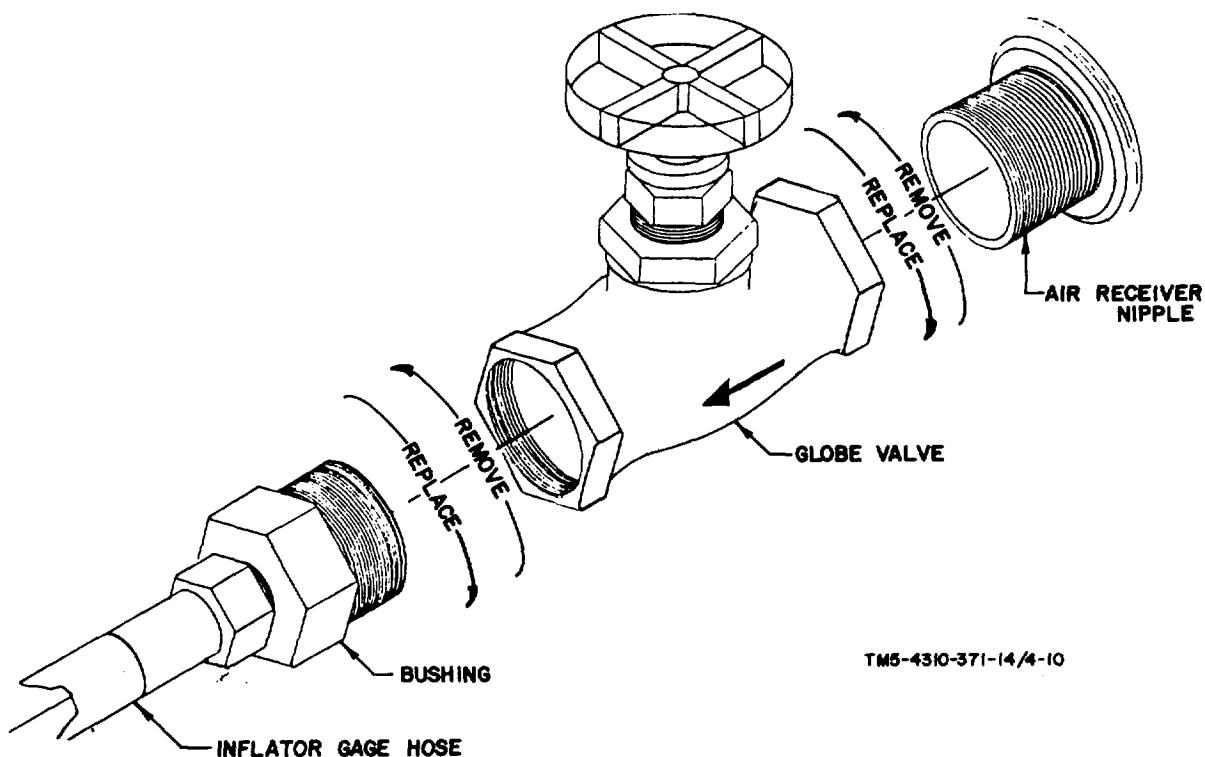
GLOBE VALVE REMOVAL AND REPLACEMENT
